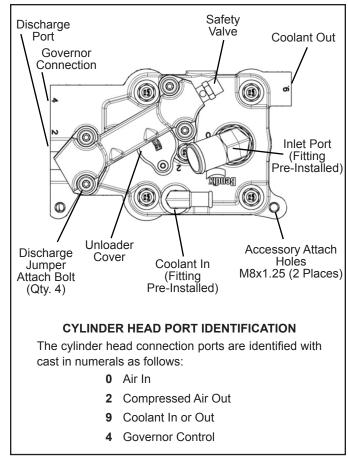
BENDIX® SNA-01™ COMPRESSOR CYLINDER HEAD
